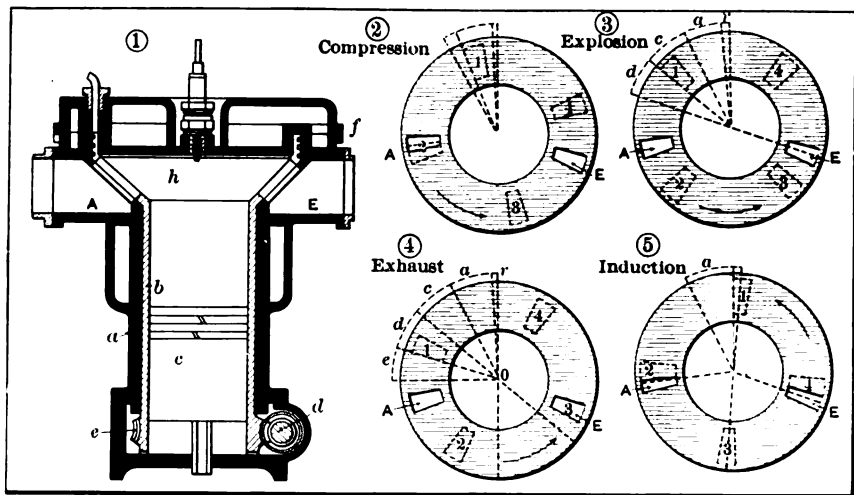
Reproduction of patent drawing for Renault valveless motor. (1) Sectional view of cylinder. (2) Plan view showing position of ports at end of suction stroke. (3) When port 1 has passed the angle *c*, representing the compression period, the explosion will take place. (4) Exhaust to begin. (5) Suction to begin.
